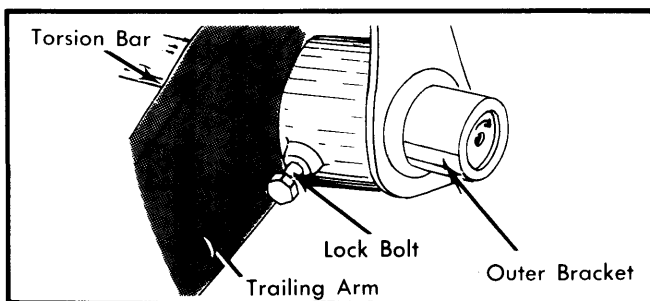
Installed View of Torsion Bar Outer End Attachment
